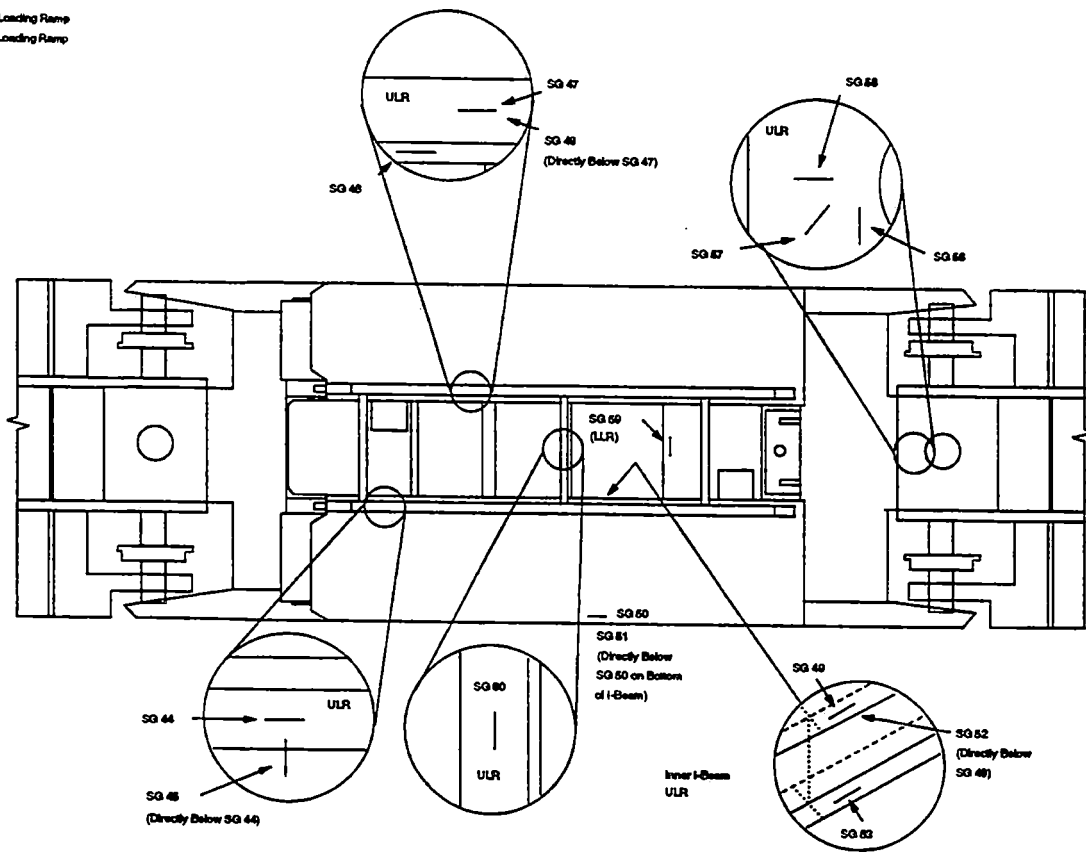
Detail A, Split Ramp Car - Strain Gage Locations.
